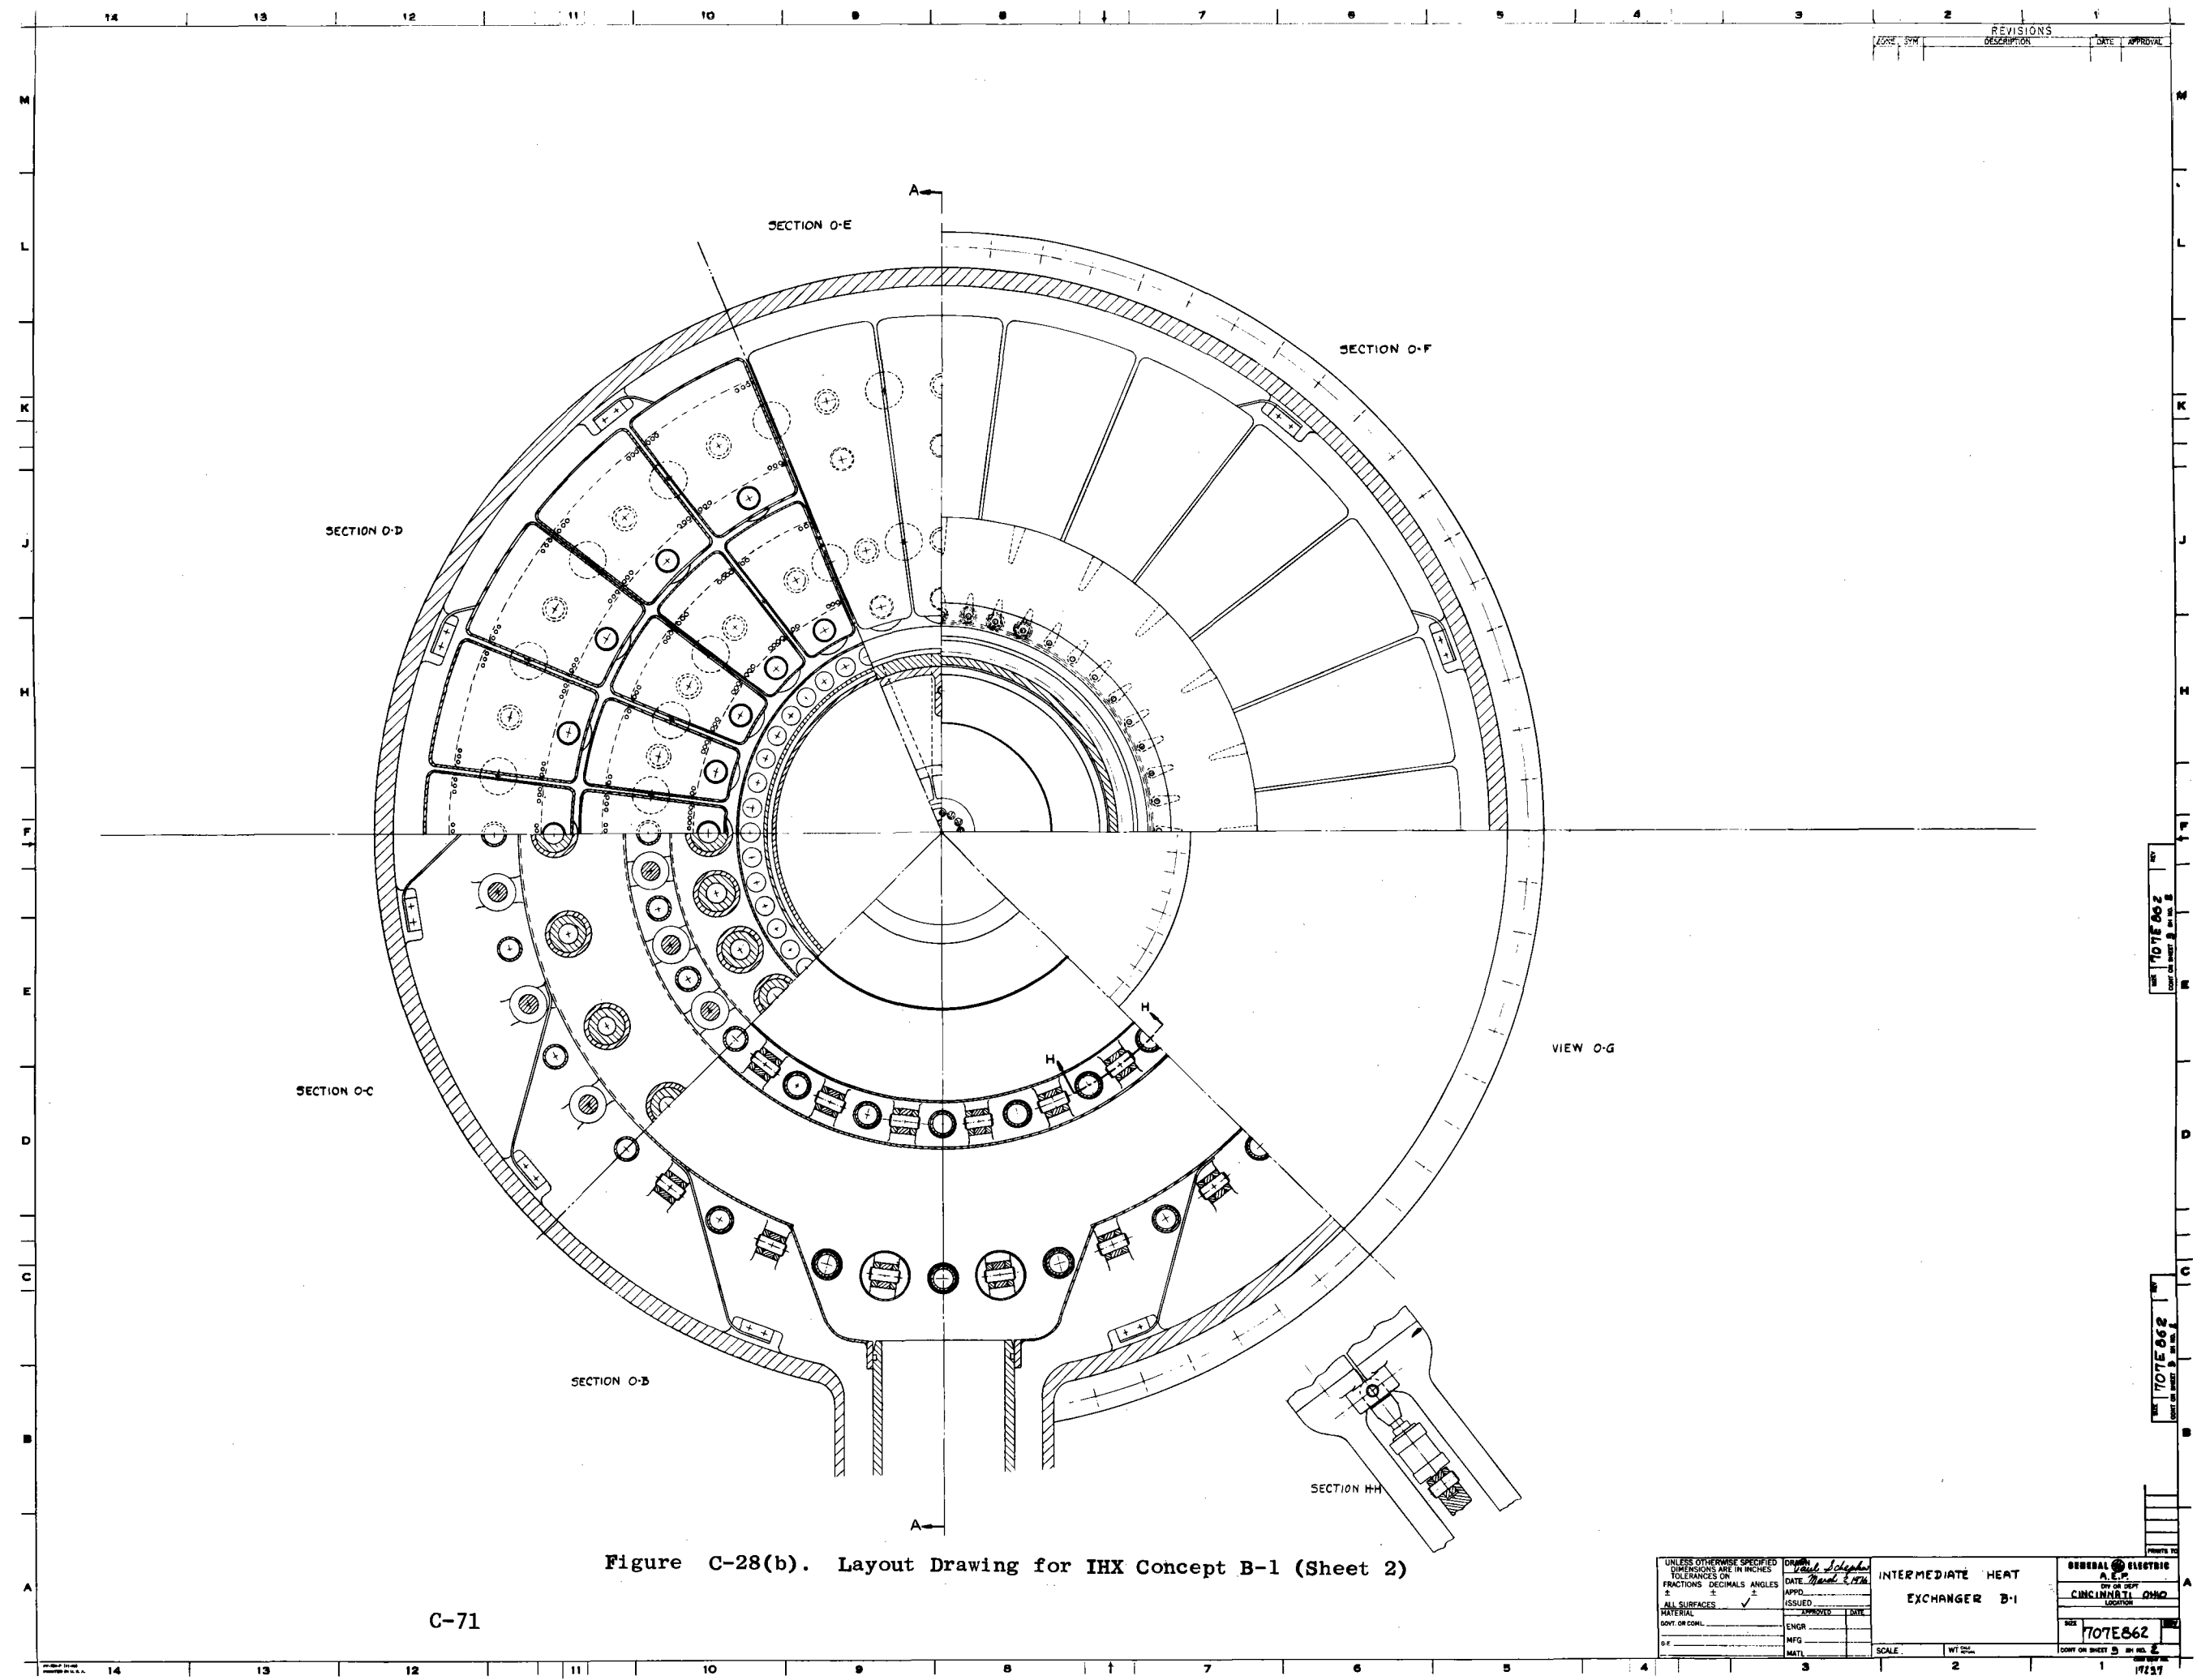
(b). Layout Drawing for IHX Concept B-1 (Sheet 2)
